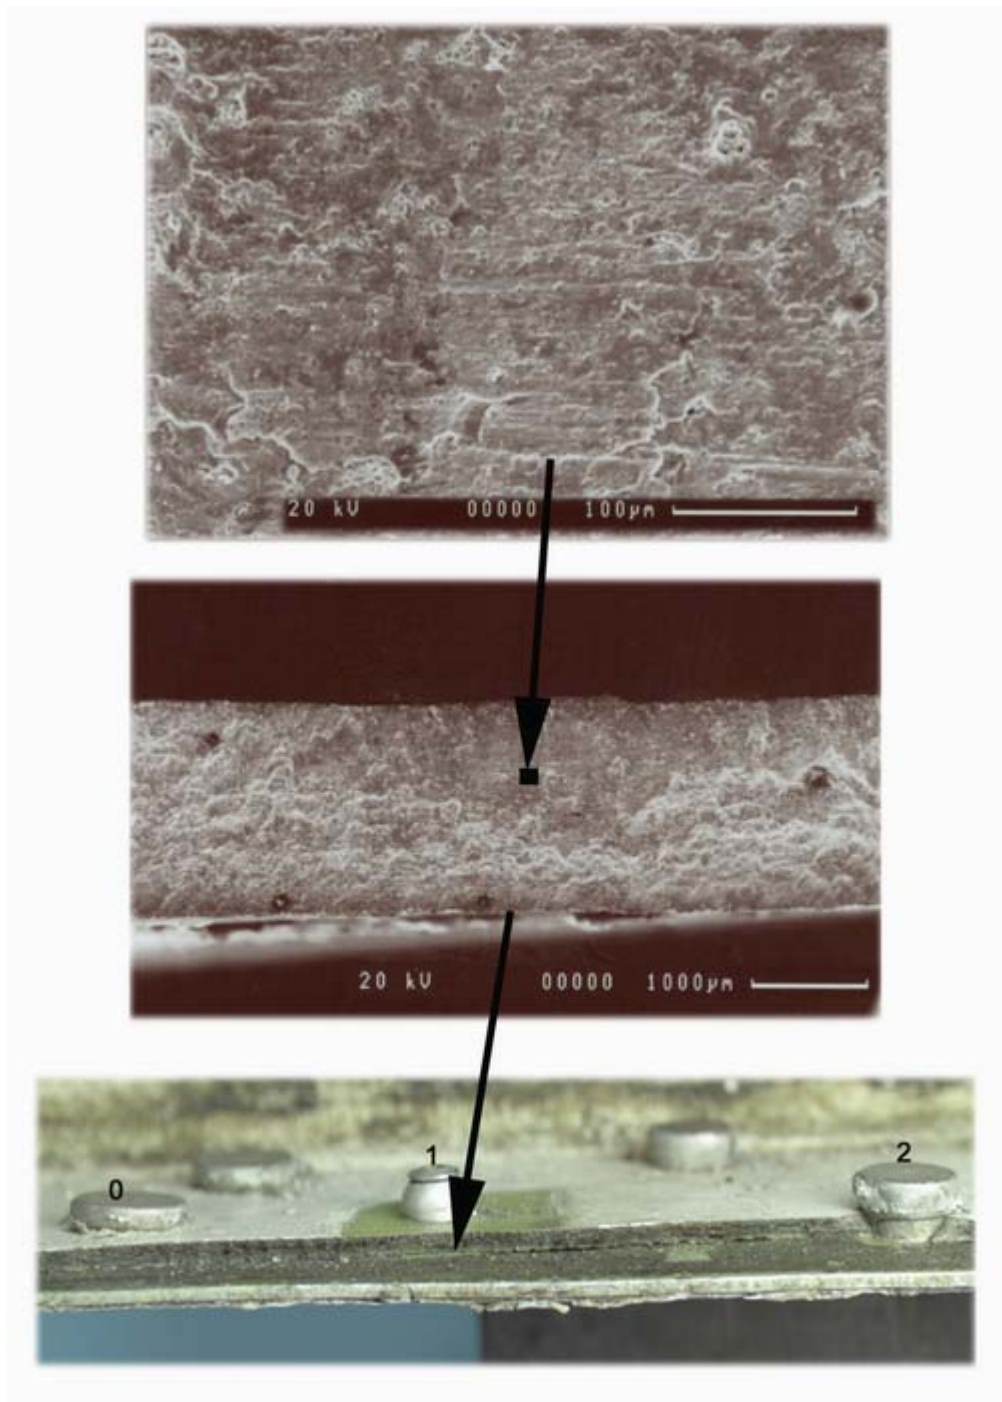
Rub marks produced by abrasion prevailed over the fracture surface near rivet number 1
